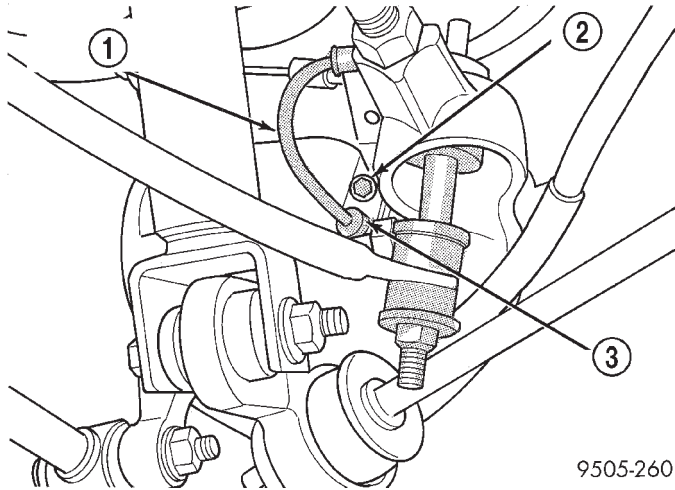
Rear Speed Sensor Head Attachment To Brake Support Plate
